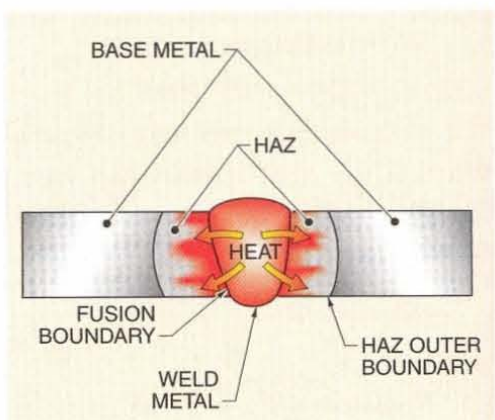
The heat of welding creates three regions of metallurgical structures: weld metal, heat-affected zone (HAZ), and base metal.
